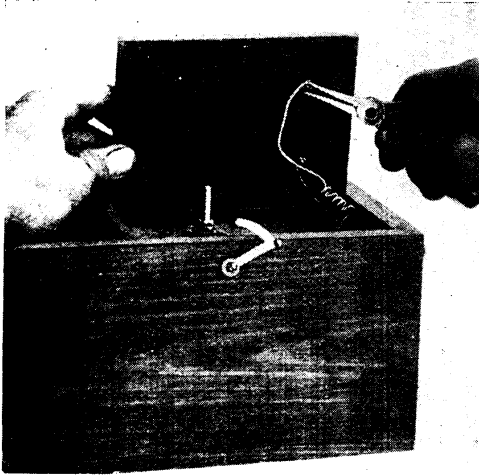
Inside the cabinet is mounted the lattice-wound variometer, which is fixed between the bottom of the chamber and the panel. The rotor is operated by the turning knob seen in Fig. 61
